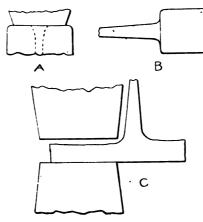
, METHOD OF DRAWING DOWN STOCK FOR VALVE YOKES.
